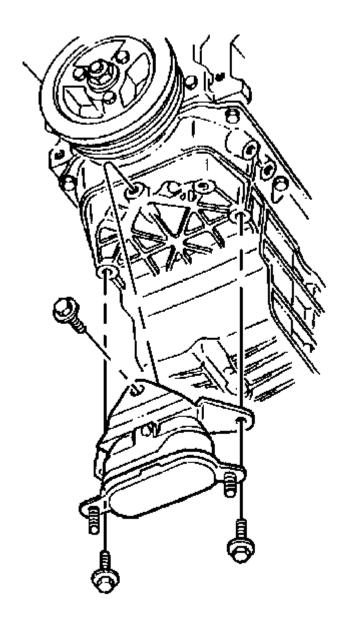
Installing Engine Mount Bracket To Oil Pan Bolts Courtesy of GENERAL MOTORS CORP.
